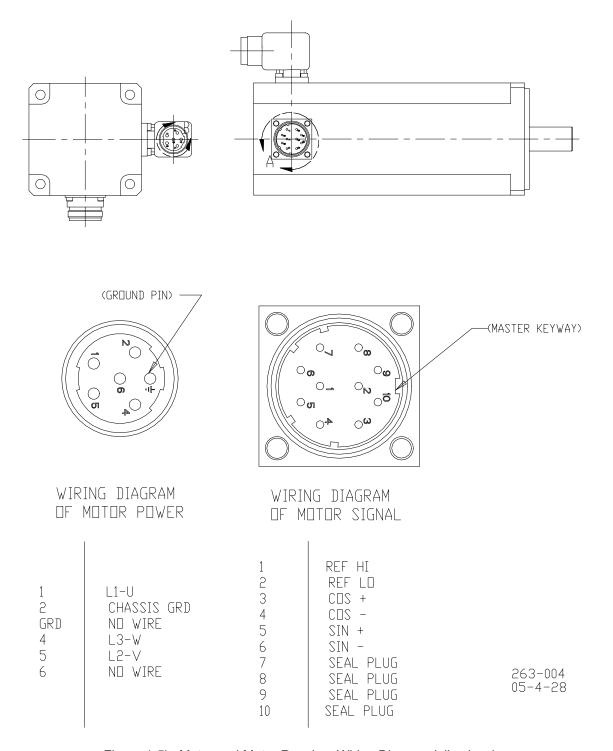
Motor and Motor Resolver Wiring Diagram (all valves)
